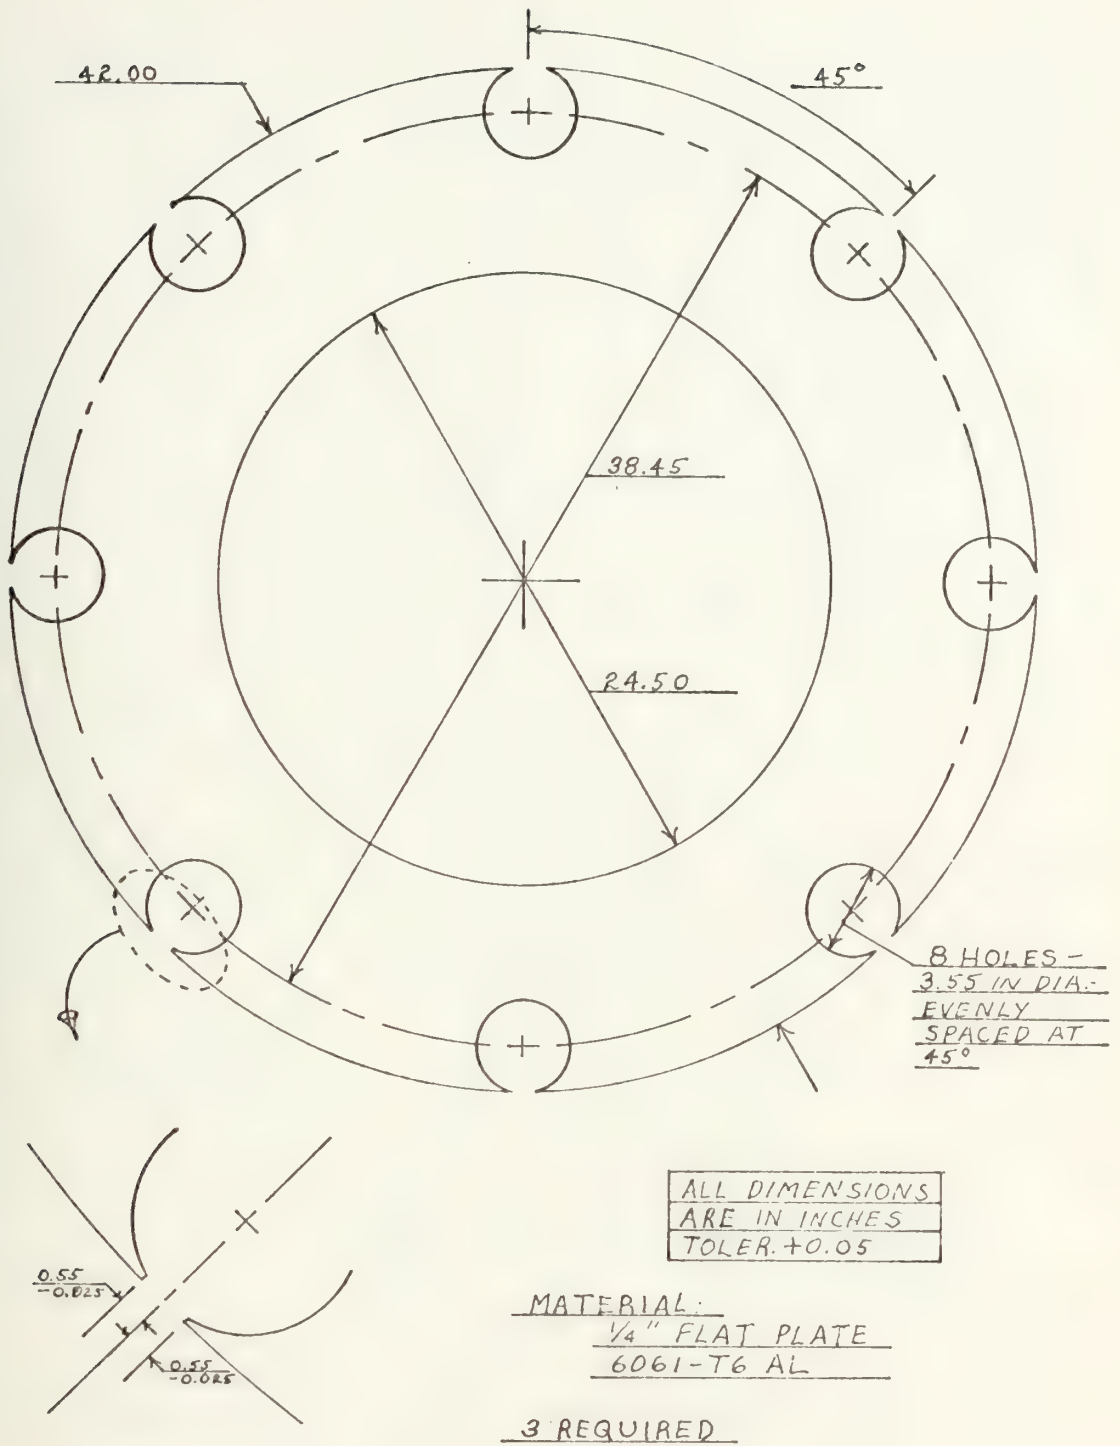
PIECE III-1-1, END AND MID SECTIONS
